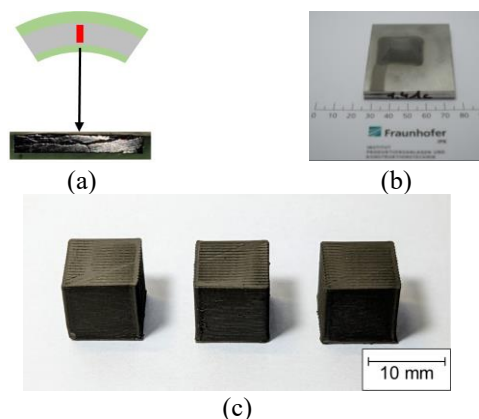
Manufactured samples of (a) extrusion, (b) cold spray and (c) fused deposition modeling.
